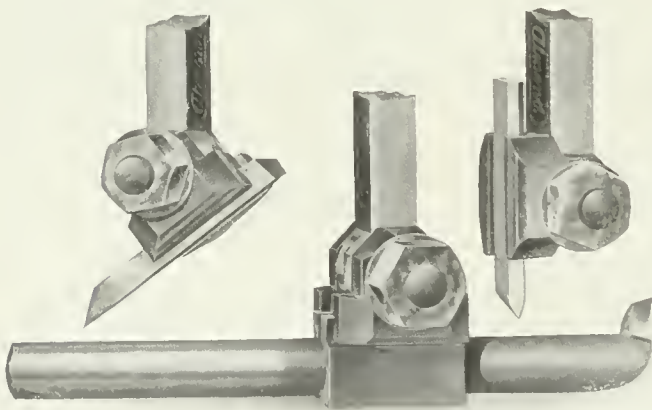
Side-tool, Threading Tool, and Method of Holding Boring Tool
